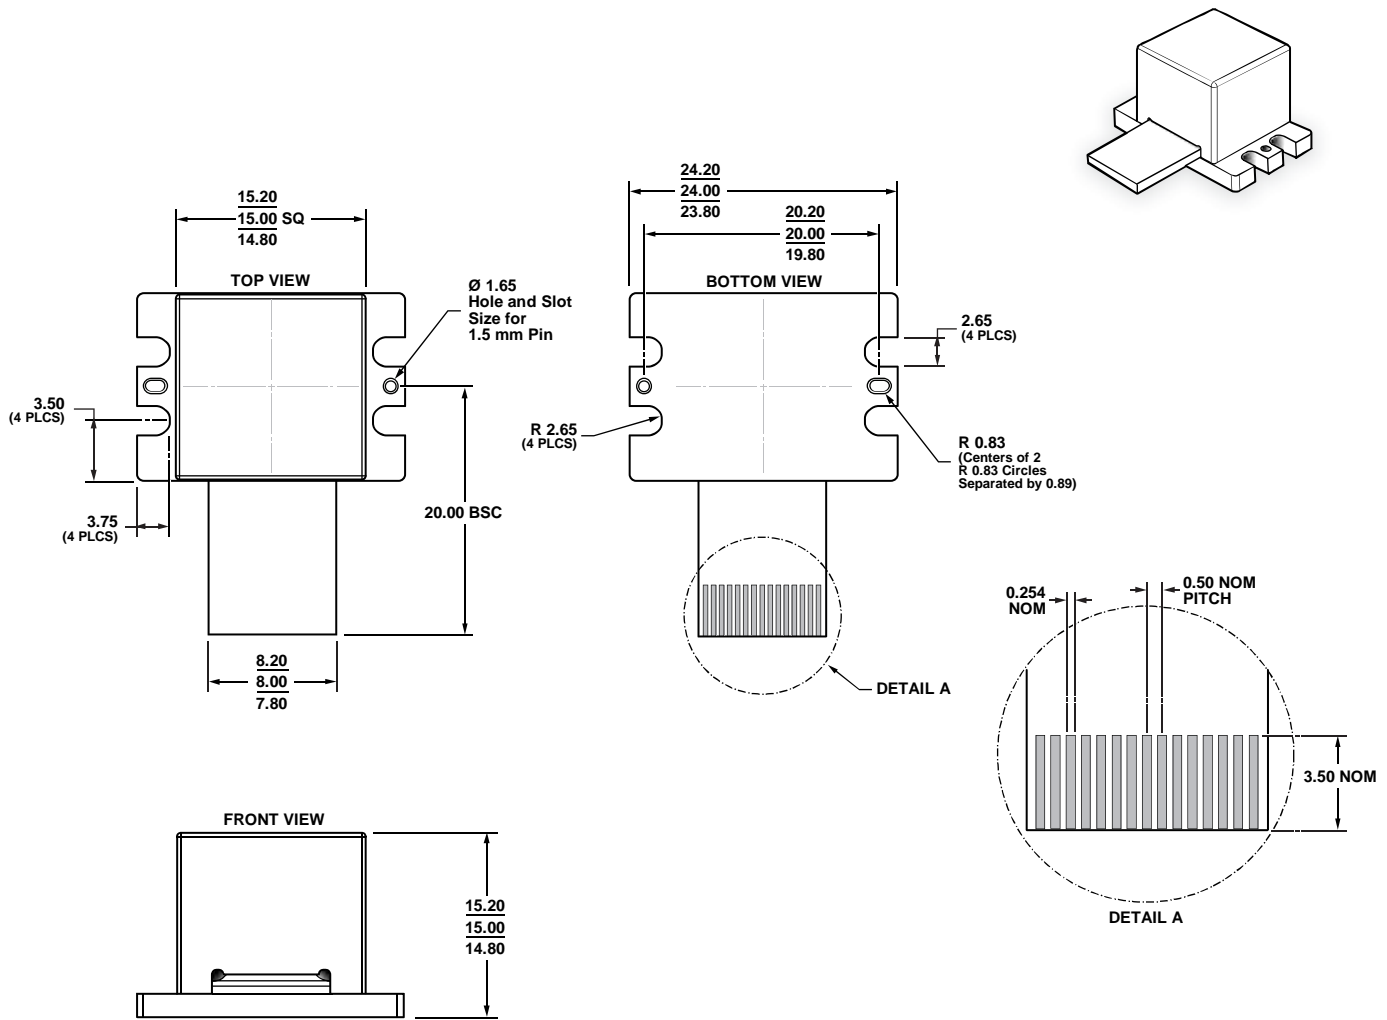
15-Lead Module with Connector Interface (ML-15-1)
